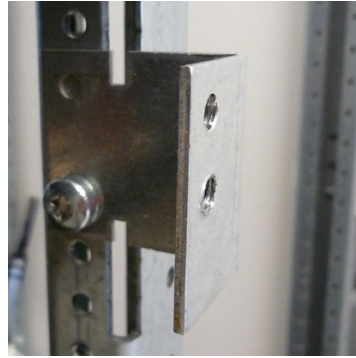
/ Figura 25: right metal holder / Premilamiera destro
